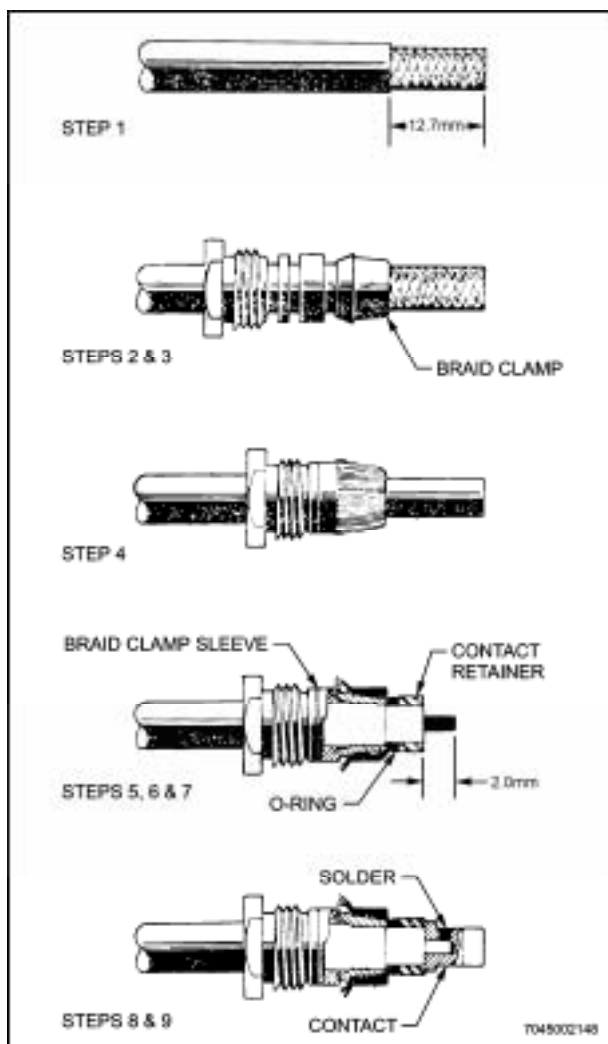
Attaching Nu-Line 1200 Series Connectors to Coaxial Cable
